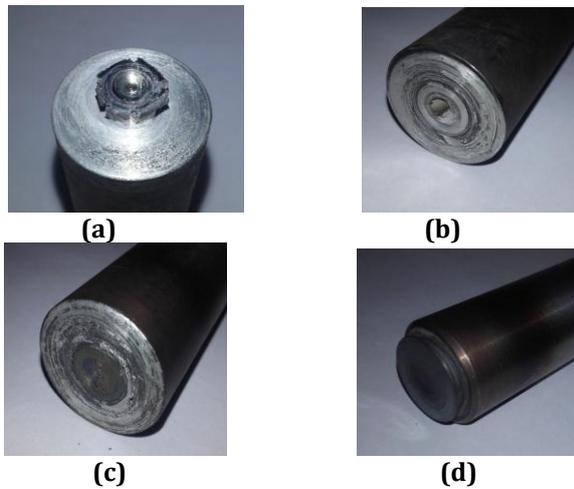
(a) Cylindrical tool break (b) diamond tool wear (C) Taper tool failure (d) cylindrical tools shoulder without pin.
